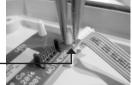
Disconnecting the Buzzer from the Indicator Board
